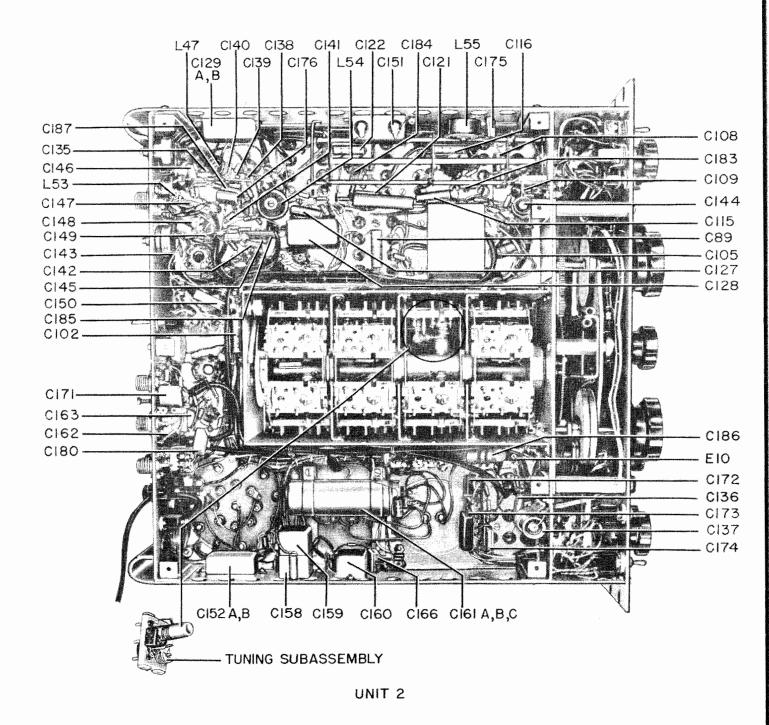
Receiver R-450/FRR-28, Bottom View, Location of Components
